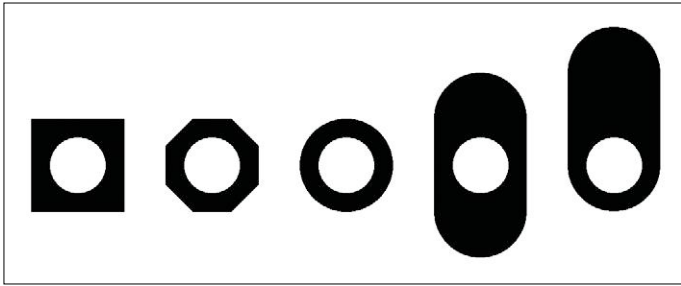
A selection of THT pads available in the popular Eagle PCB design tool.
